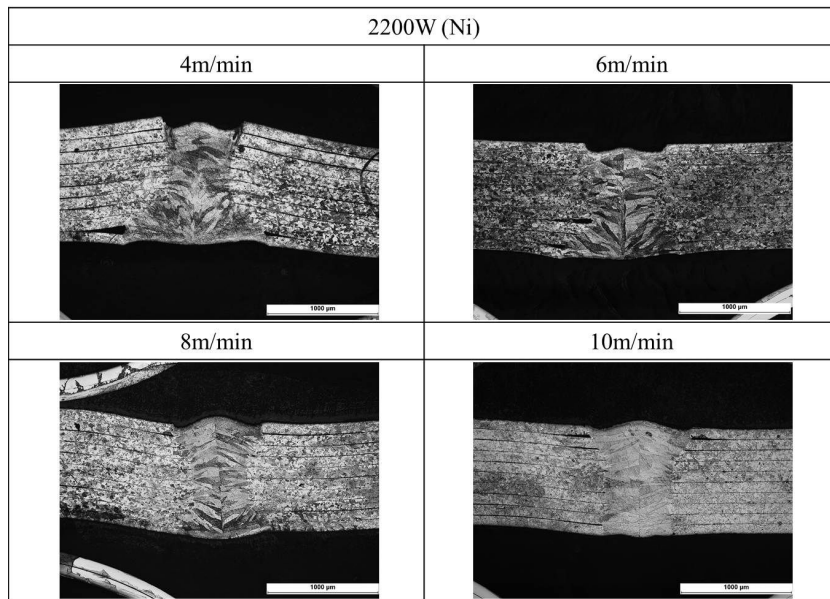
Bead shape of Lap-Joint welding of Ni thin plate
